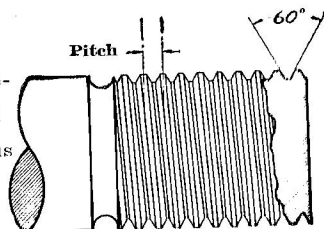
2.5 mm. Pitch Metric Screw Thread
